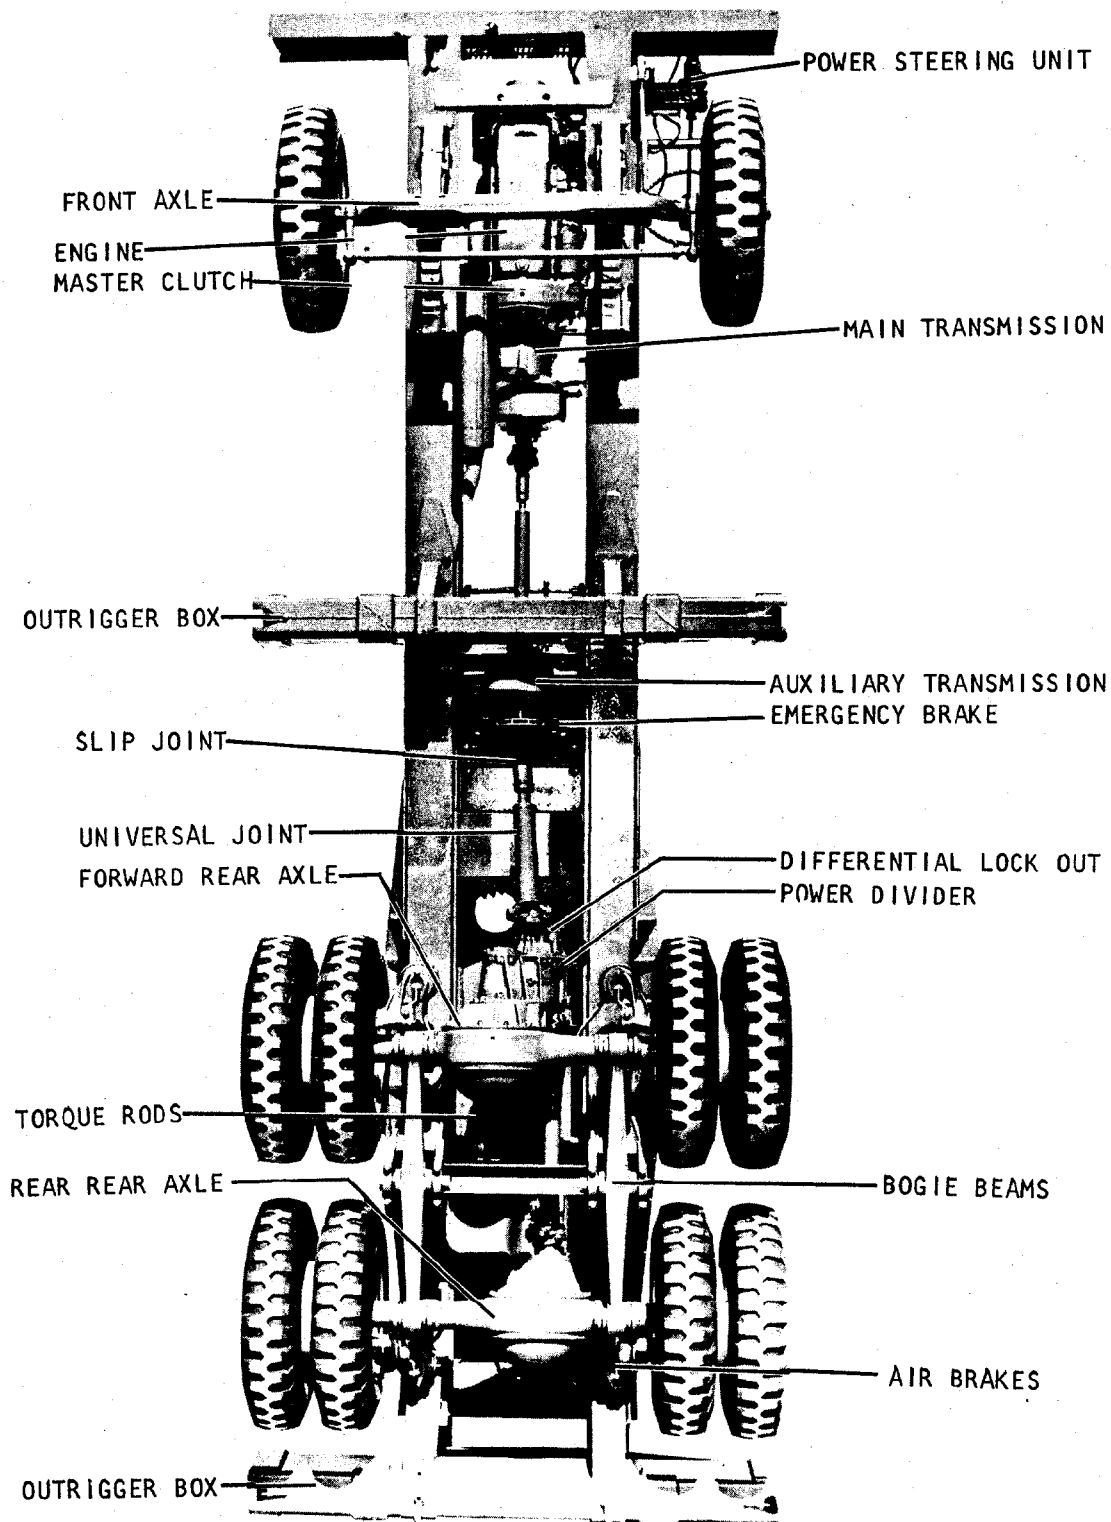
LOWER FRAME (BOTTOM VIEW)
